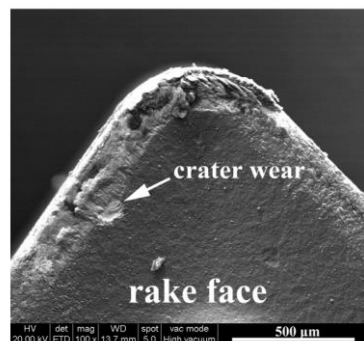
Tool wear mechanism at the rake face (crater wear) [43]
